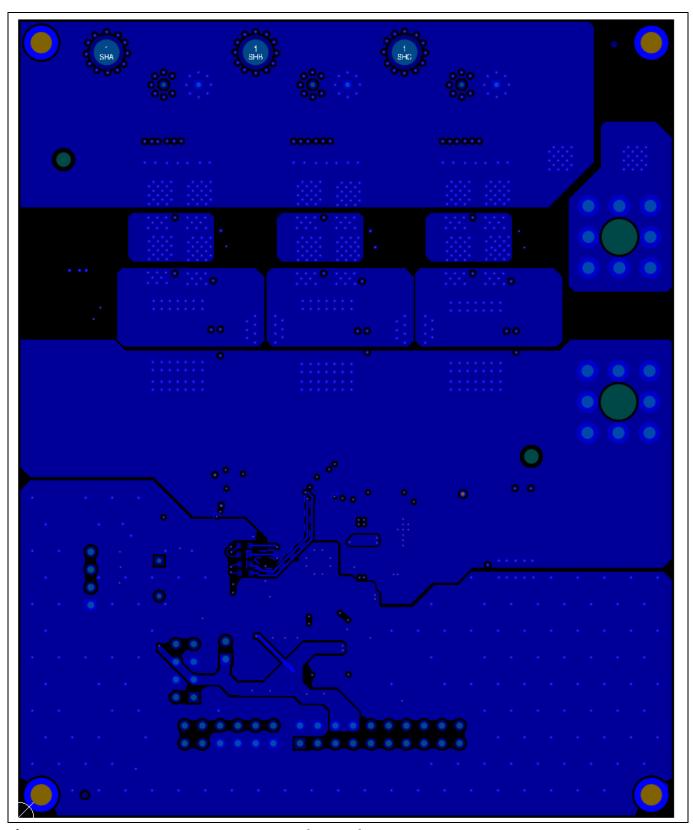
EVAL_6EDL7141_1KW_36V PCB bottom layer
